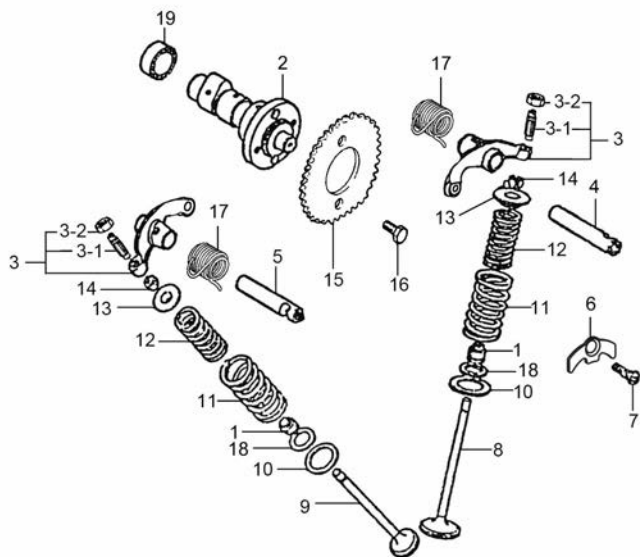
CAMSHAFT-VALVE (P05-S070-0007)
